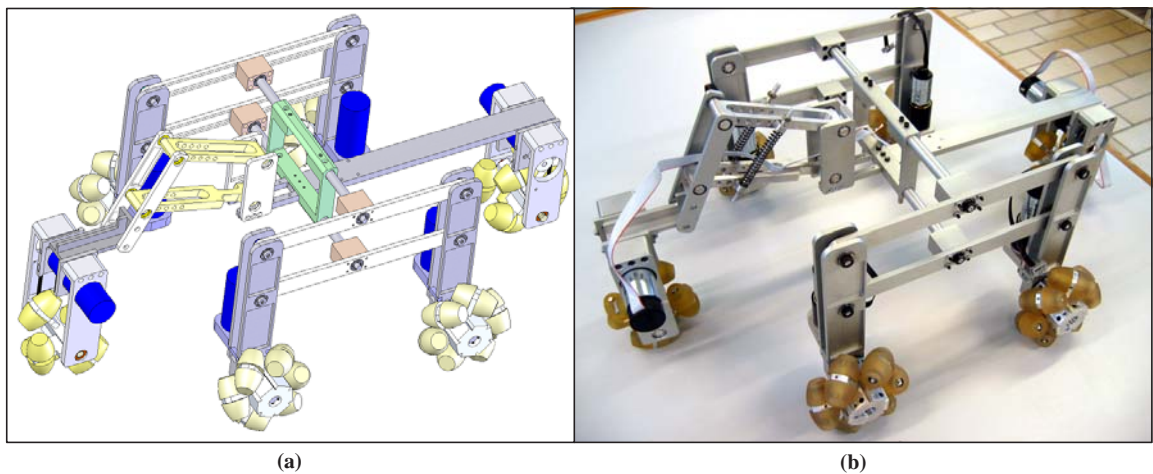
Assembly of ODR: (a) CAD model (b) Prototype
